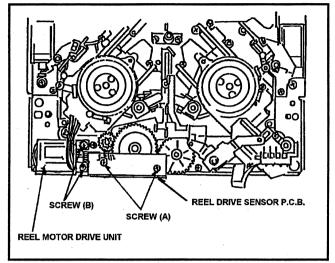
Removal of Reel Drive Motor Unit
